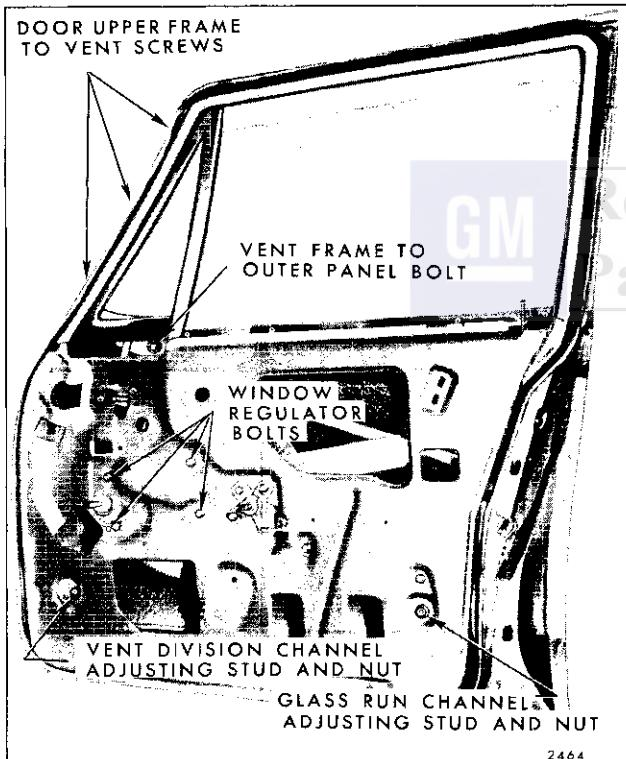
Door Ventilator and Regulator Attachment — "B" Styles Shown, "A" Styles Similar
